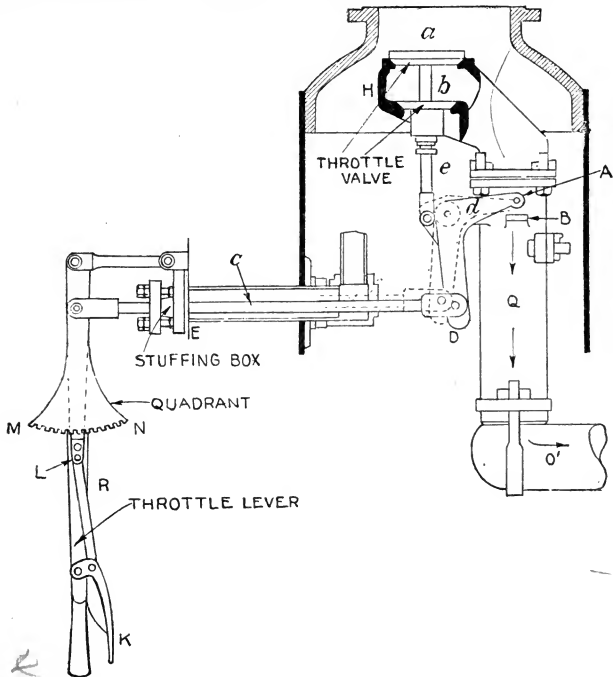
,919.—Construction of throttle valve and throttle. The valve as shown is of the double sealed poppet type. The upper valve *a*, is the larger. The lower valve *b*, is of such a diameter that it will just pass through the upper seat. The steam, therefore, exerts a pressure on the lower face of the smaller and the upper face of *a*. As the area of *a*, is the greater, the resultant tendency is to hold the valve closed. The valve is, therefore, partially balanced. It is, however, usually difficult to open large throttle valves, such as are now used on locomotives with high boiler pressure, and with an ordinary direct form of leverage it is necessary to give a strong, quick jerk to the throttle lever before the valve can be started from its seat. The leverage arrangements as shown obviate this difficulty. The rod *c*, connects with the lever in the cab and communicates its pull to the bell crank *d*, whence it is carried by the stem *e* to the valve. The pivot of the bell crank is provided with a slotted hole. At the start the length of the lever arm is about $2\frac{1}{4}$ inches while the long arm is $9\frac{1}{2}$ inches. After the valve has been lifted from its seat and is free from the excess of pressure on *a*, the projecting horn *A*, on the back of the bell crank comes in contact with the bracket *B*, on the side of the throttle pipe and the crank takes the position shown by the dotted lines in the figure. The end of the horn then becomes the pivot and the length of the short arm of the lever is changed to $9\frac{1}{2}$ inches and of the long arm to about $11\frac{1}{2}$ inches.
